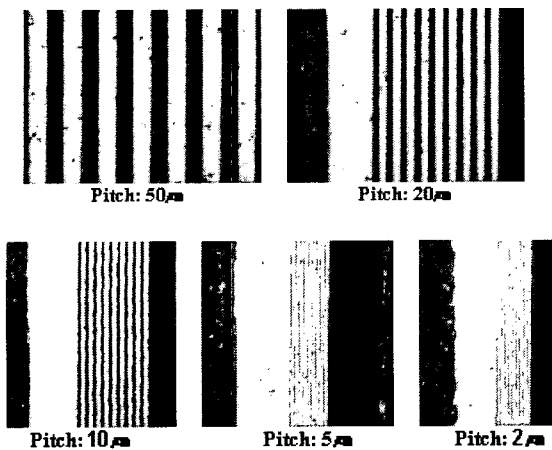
Machining surface of workpiece(depth 5 $\mu$ m)
